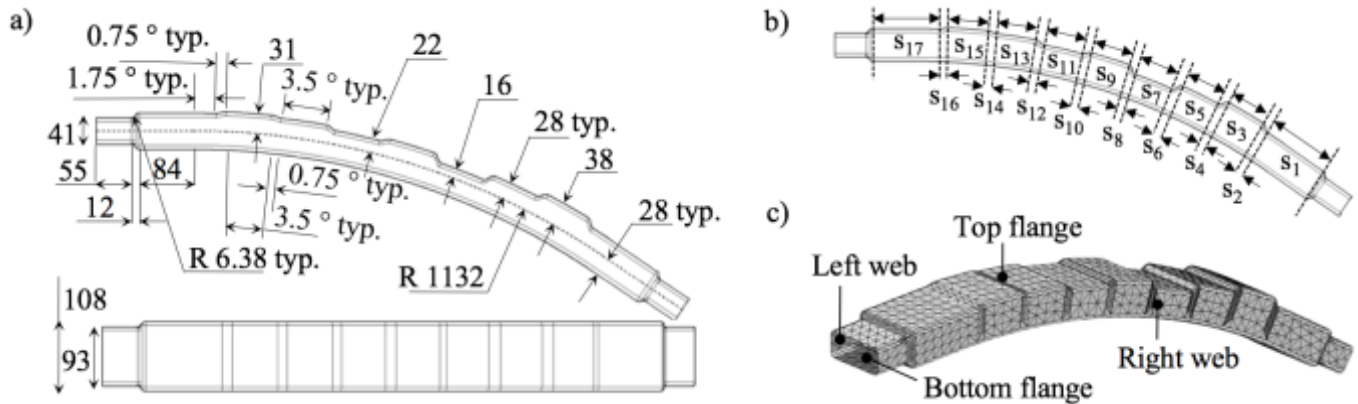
a) Mandrel shape and overall dimensions (in mm); b) Mandrel sections definition and numbering; c) Mandrel mesh and master faces.
